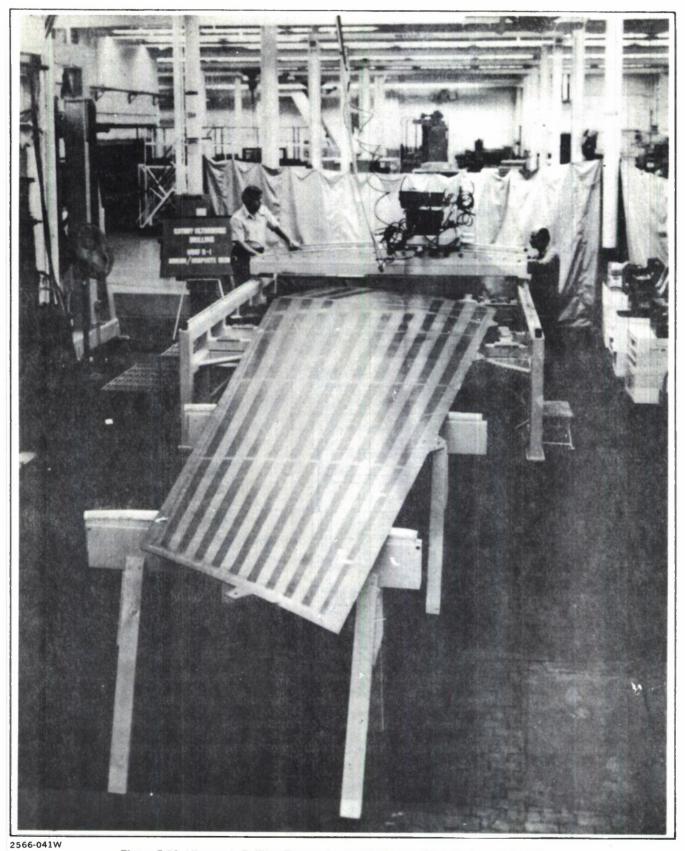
Ultrasonic Drilling Fixture for Hybrid Cover of B-1 Horizontal Stabilizer
